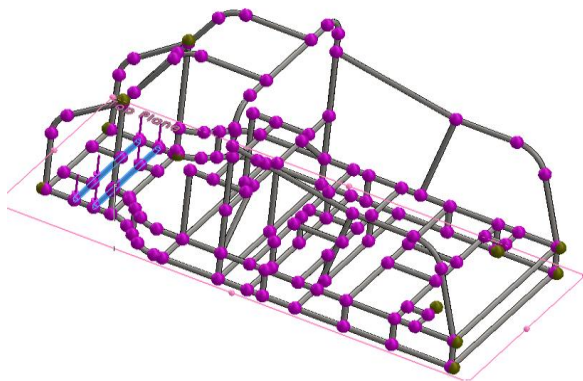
Complete welded structural frame of the chassis (isometric view)
